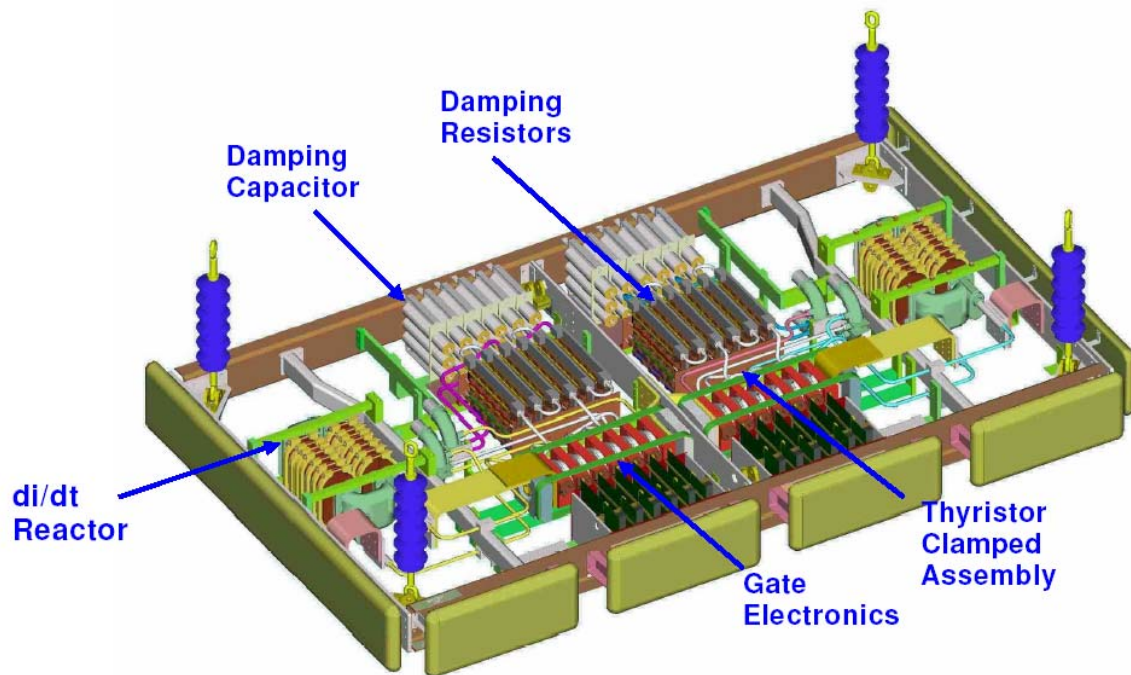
Mechanical Valve Module Housing Two Electrical Valve Sections
